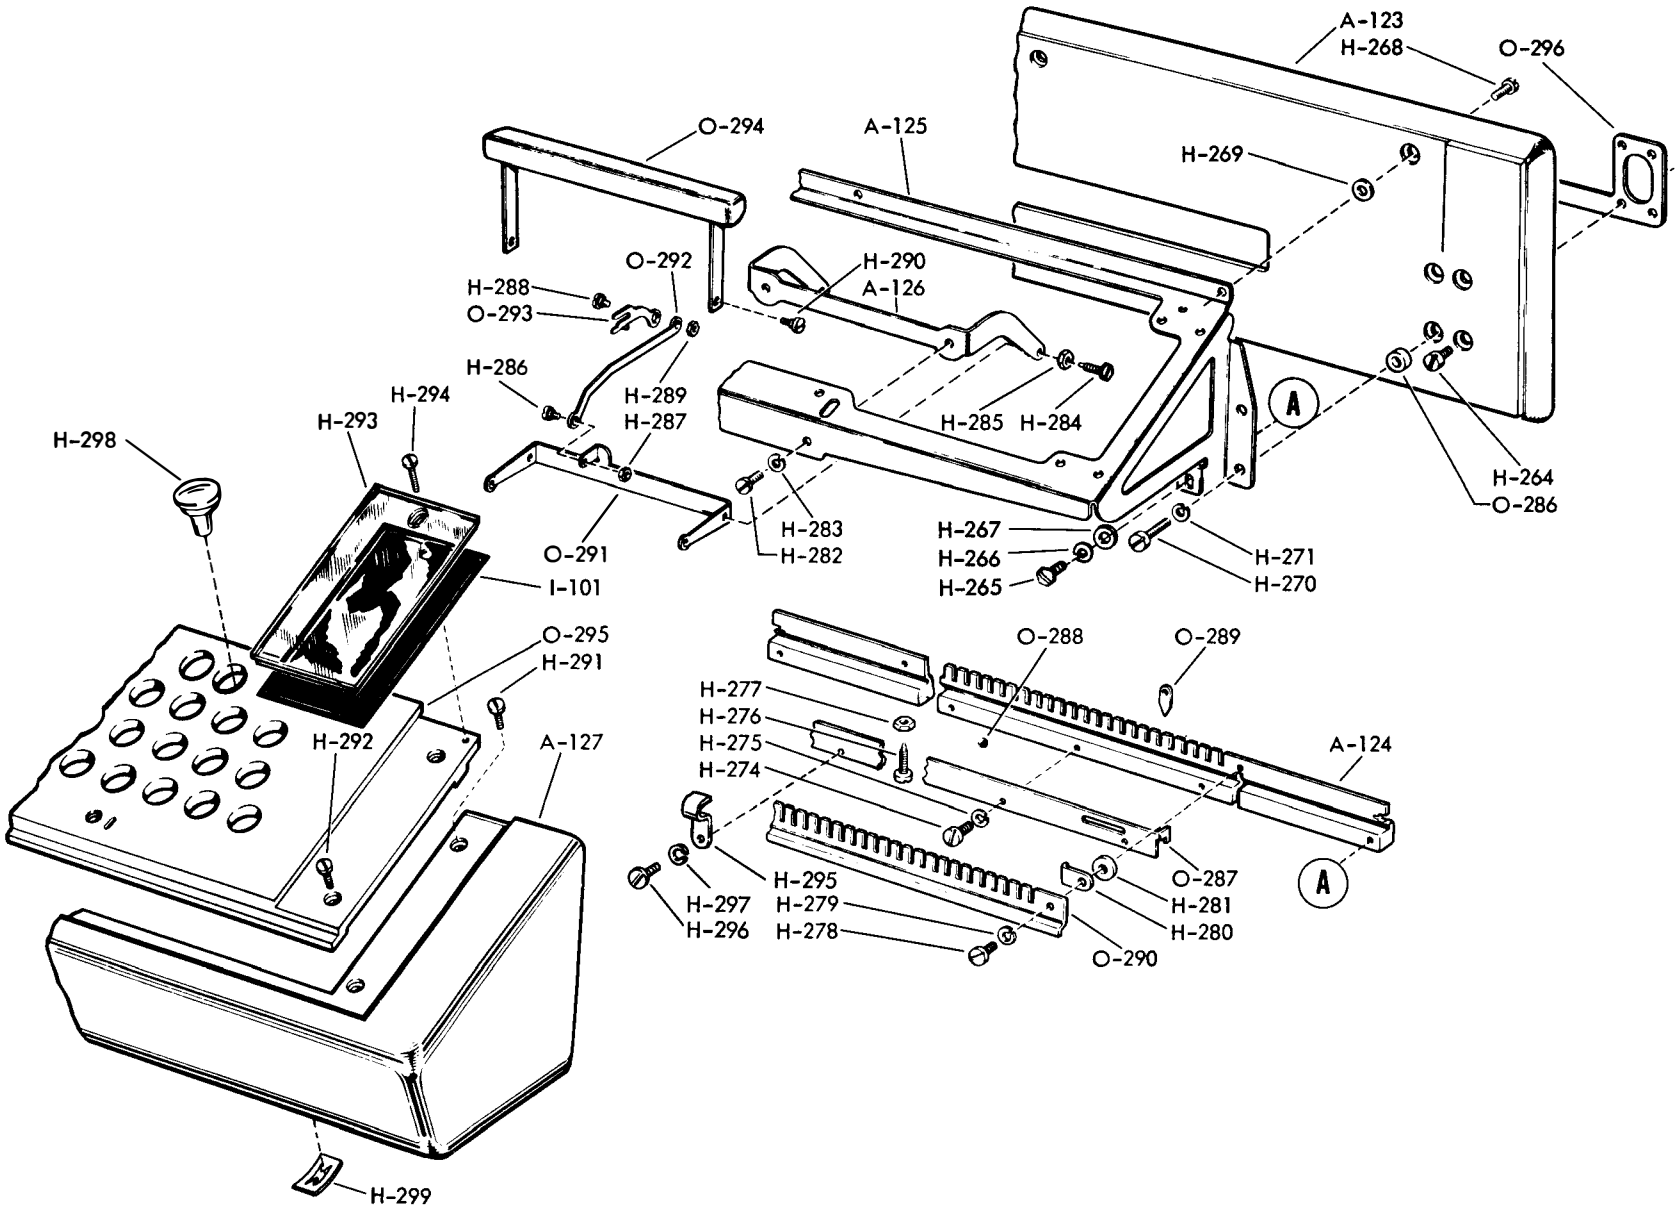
Keyboard Mechanism, MX-1114B/UG
